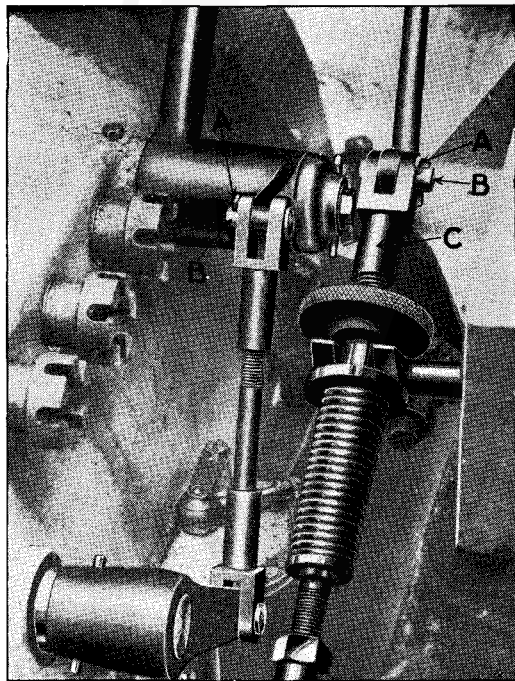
Adjustment Links of Clutch and Brake Pedals.
